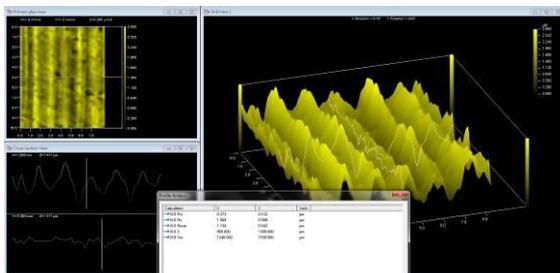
Laser scan measurement of the Bulkhead main sealing surface.
